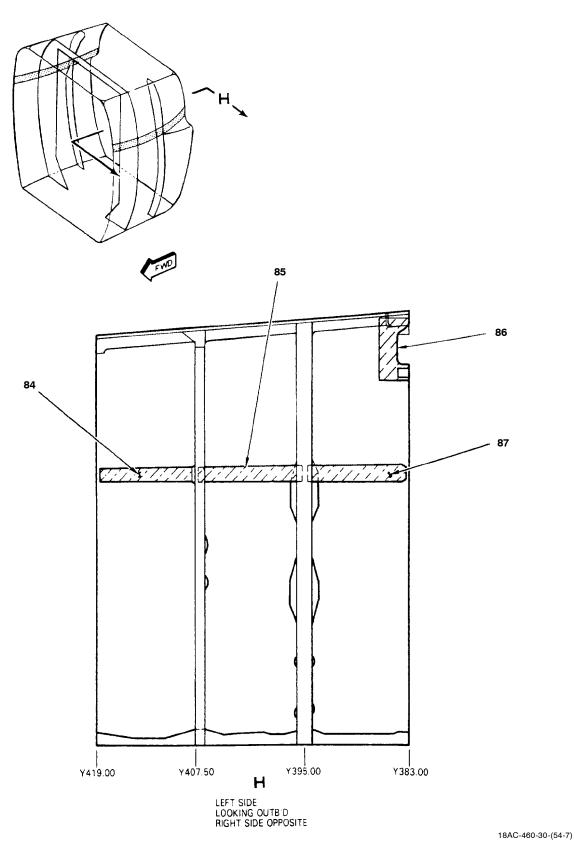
No. 2 Fuel Tank Cavity Foam Filler - 161742 AND UP (Sheet 7)
